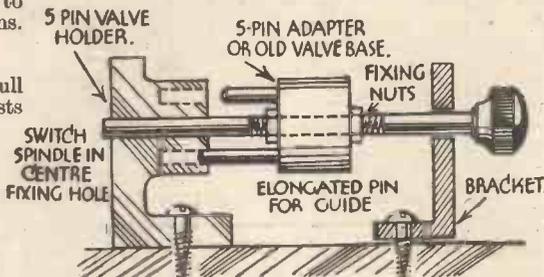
Using a valve base or similar adaptor for switching purposes.
